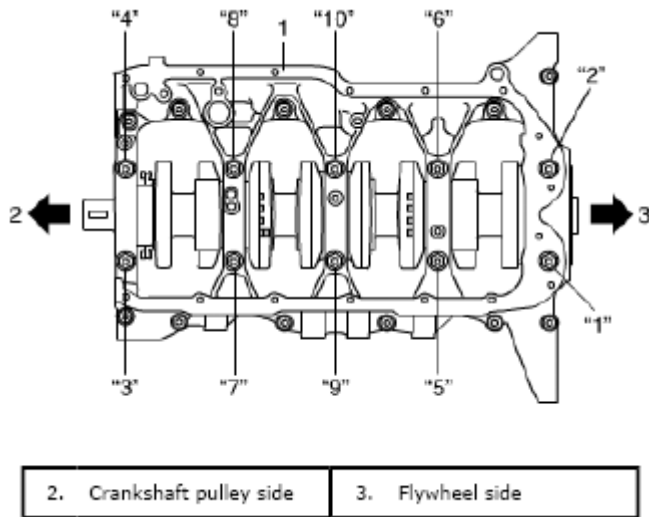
Identifying Loosening Sequence Of Crankcase Bolts
